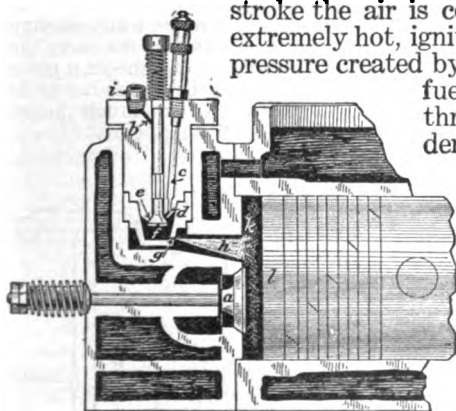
Section through cylinder head of Diesel type engine. *a* air intake valve; *b* fuel passage; *c* needle valve stem; *d* needle valve; *e* valve into *f*, fuel cup; *g* spray opening; *h* spray of vapor; *i* fuel supply pipe; *k* cylinder; *l* piston.
